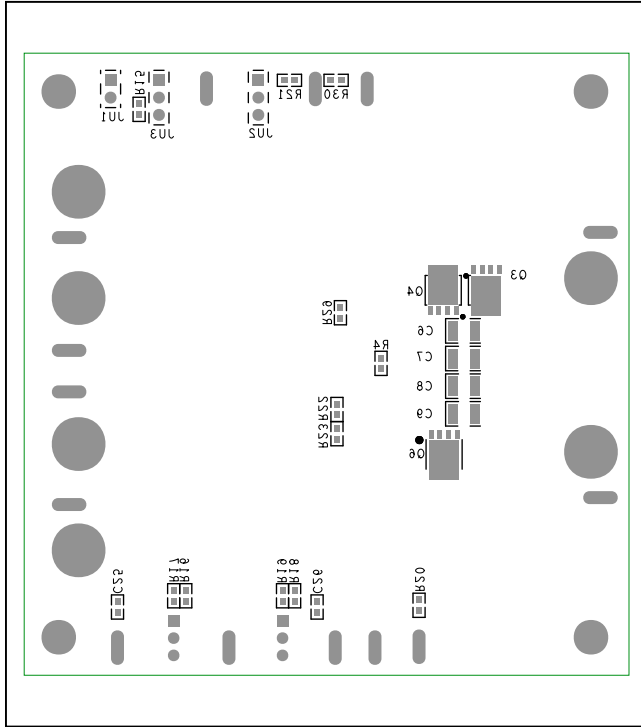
MAX17558 EV Kit Component Placement Guide—Solder Bottom Side
